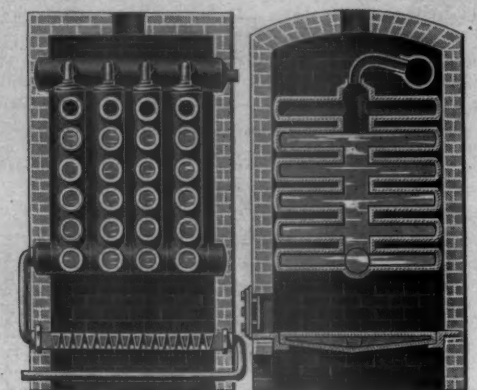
THE B. T. BABBITT BOILER, 1869.
